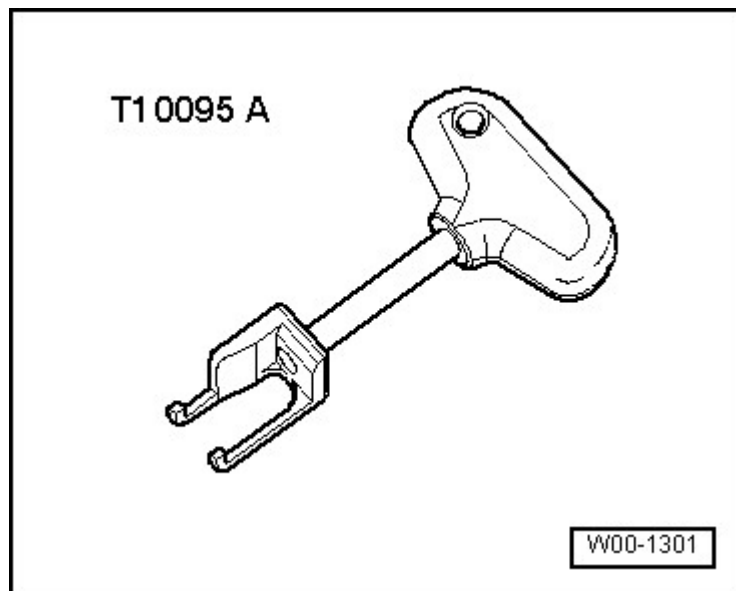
Identifying Puller For Ignition Coil T10095 A
